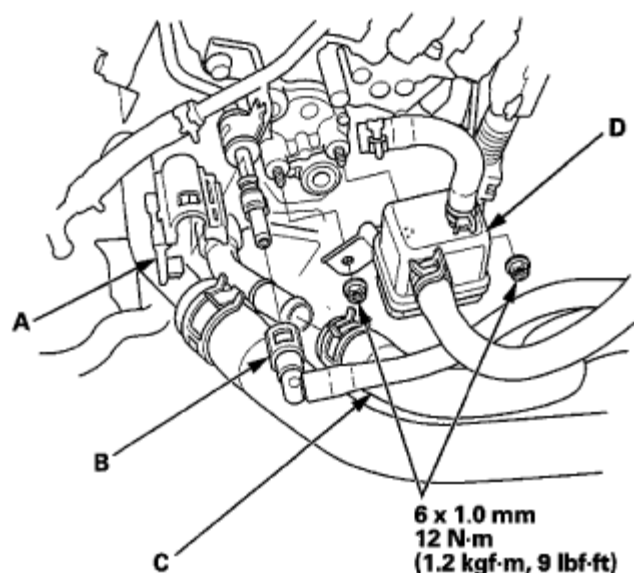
Identifying Quick-Connector Fitting Cover, Fuel Feed Hose, Heater Hose, EVAP Canister Purge Joint With Mounting Bolts Torque Specification
